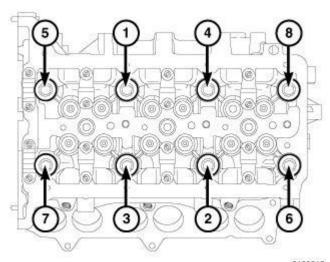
Cylinder Head Alignment Tools & Bolts Courtesy of CHRYSLER GROUP, LLC
